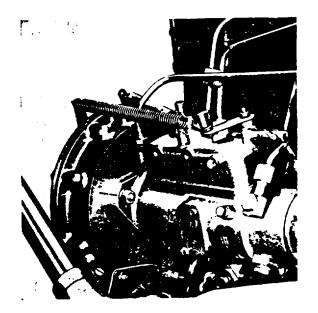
Timing Marks on Fuel Pump Flange and Timing Case.
